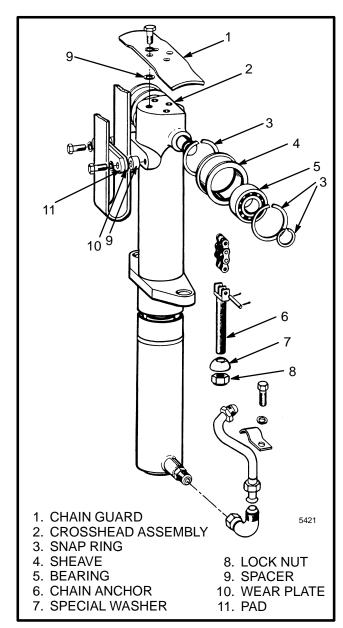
STANDARD MAST CYLINDER AND CROSSHEAD
